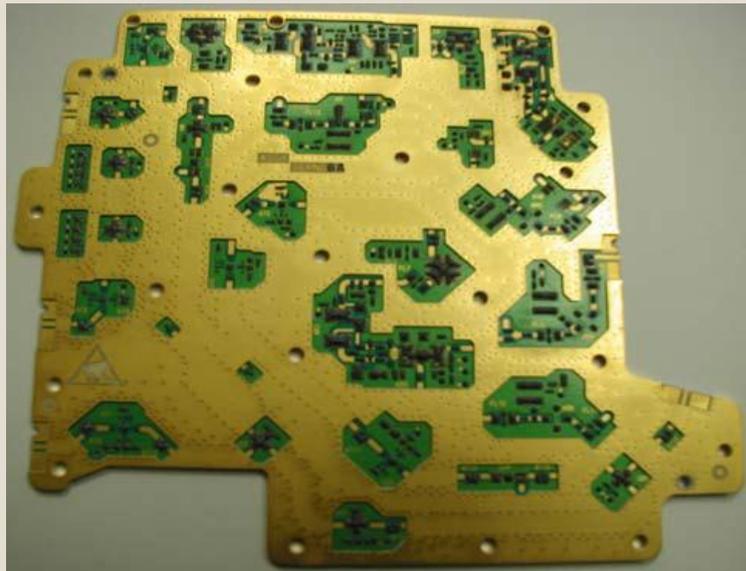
Solder Paste Bricks after 1st and 2nd Print showing no paste smearing
